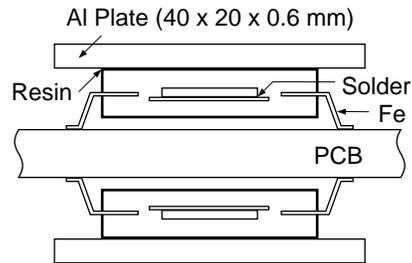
Multiple packages double-side mounted on PCB, with heat sink
